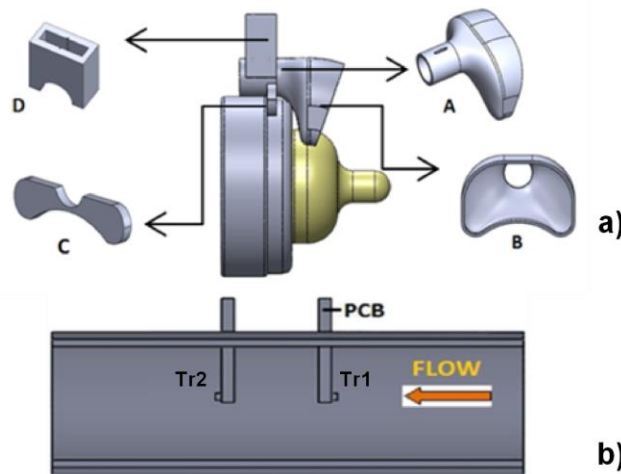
a) Assembly of mechanical components: (A) duct inserted into a pneumatic connector, (B) pneumatic connector, (C) duct support, (D) PCBs support. b) Transistors inserted into the duct and mounted.
